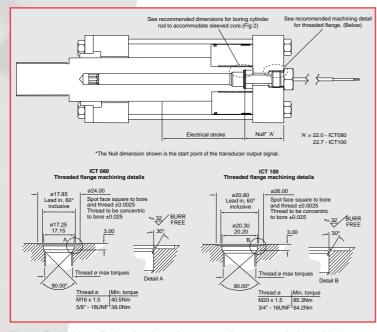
Typical installation for tie-rod actuator. Recommended machining details for threaded flange attachment.
